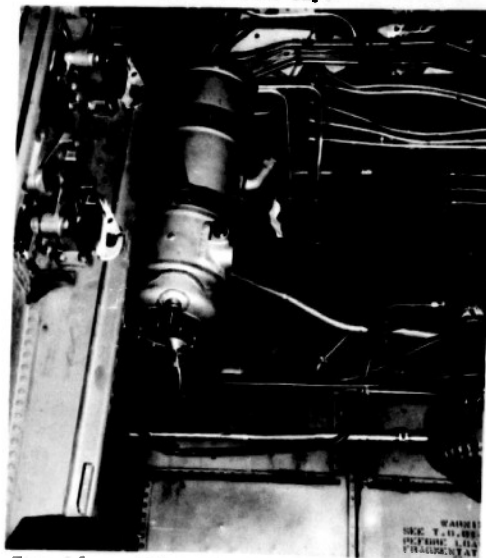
Hydraulic system in rear bomb bay for operating the jet propellant throttle valves.
